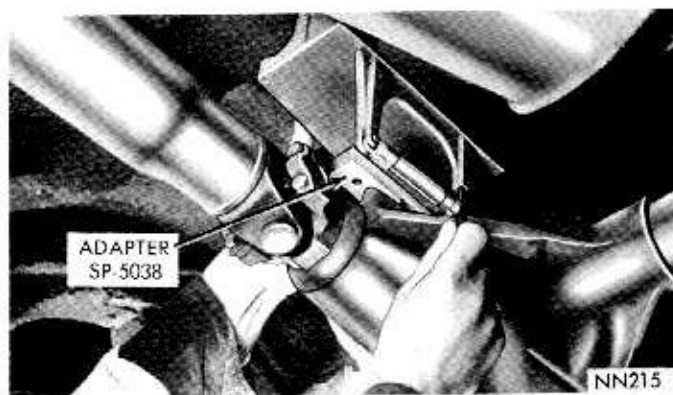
Adjusting Gauge on Differential (Models with 7-1/4" Axle) (Rear Joint Angle Reference)
